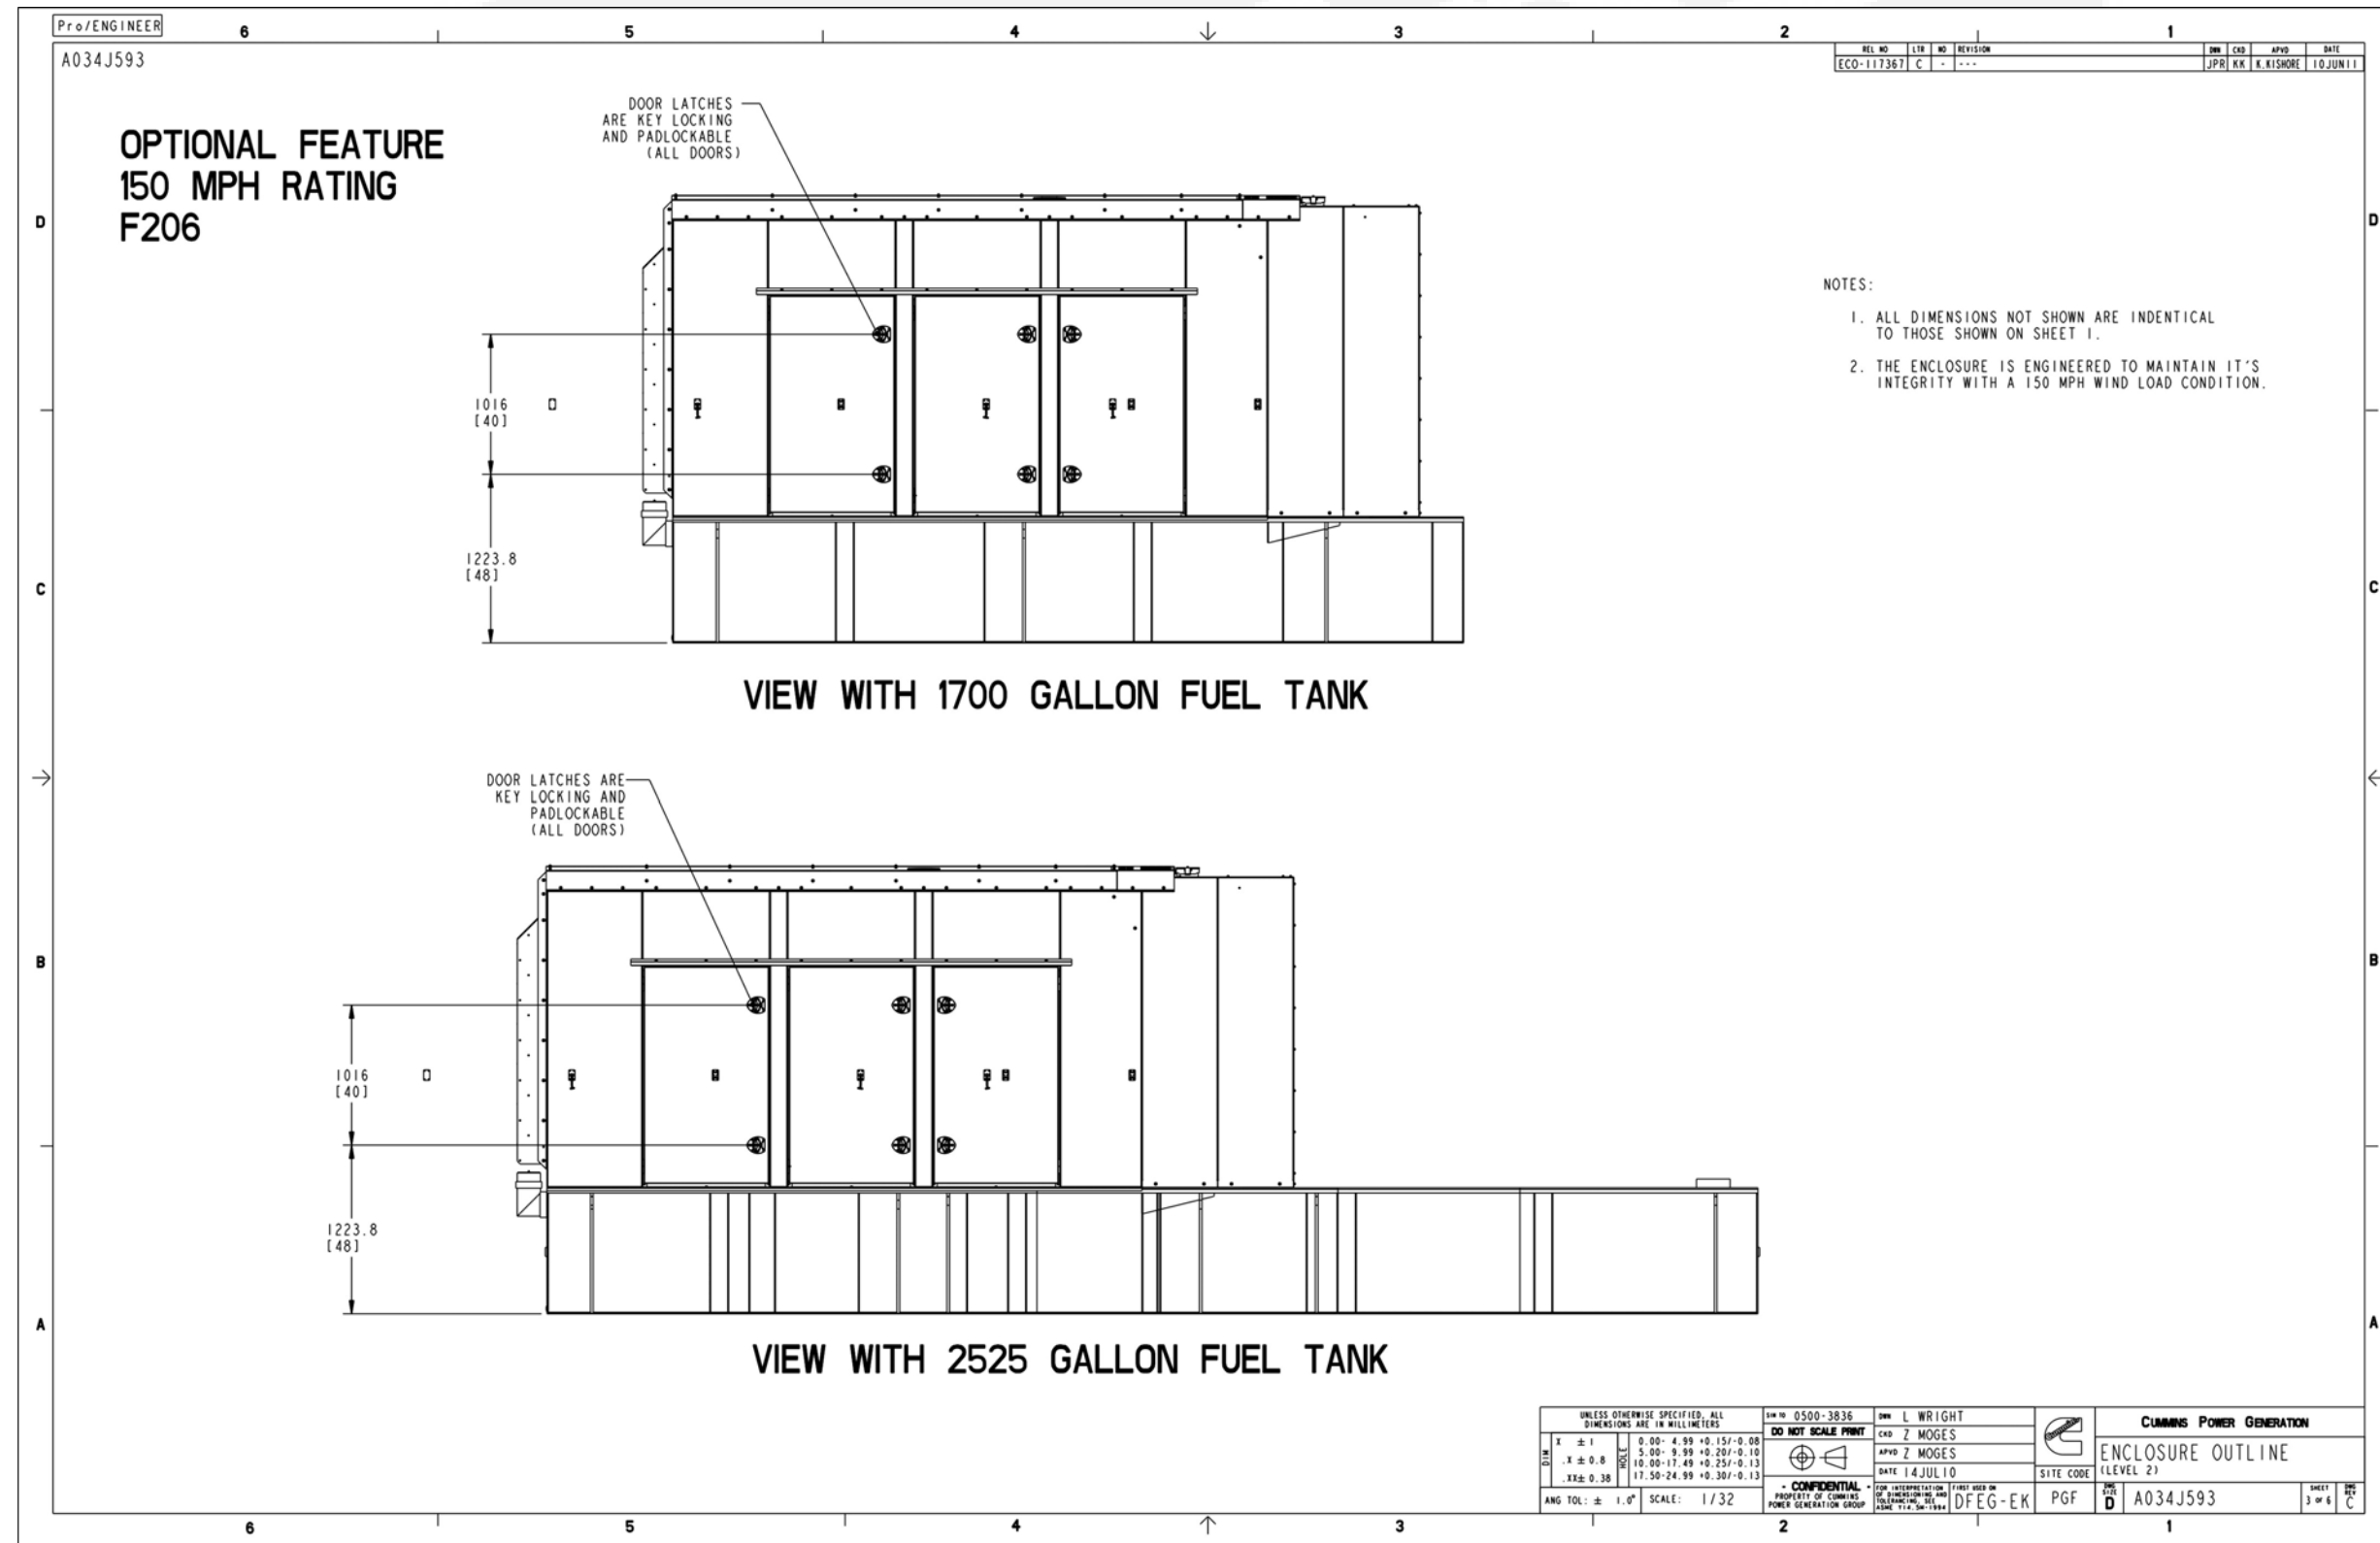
ENCLOSURE OUTLINE DRAWING (F202, F205, F206, F208, F209) (SHEET 3)
